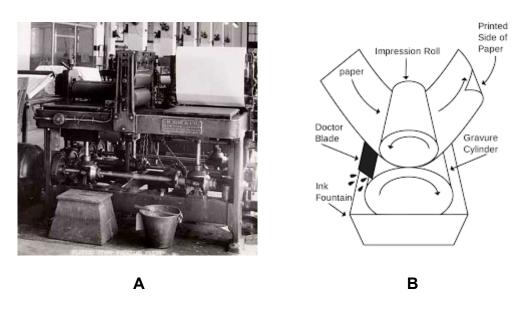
A) Intaglio printing machine at the United States Bureau of Engraving and Printing¹⁷ and B) a diagrammatic representation of the Intaglio printing process showing the "Doctor Blade" that removes excess ink from the cylinder ("Gravure Cylinder", which contains the stamp printing plate) prior to pressing the ink-filled printing plate onto the paper¹⁸.
